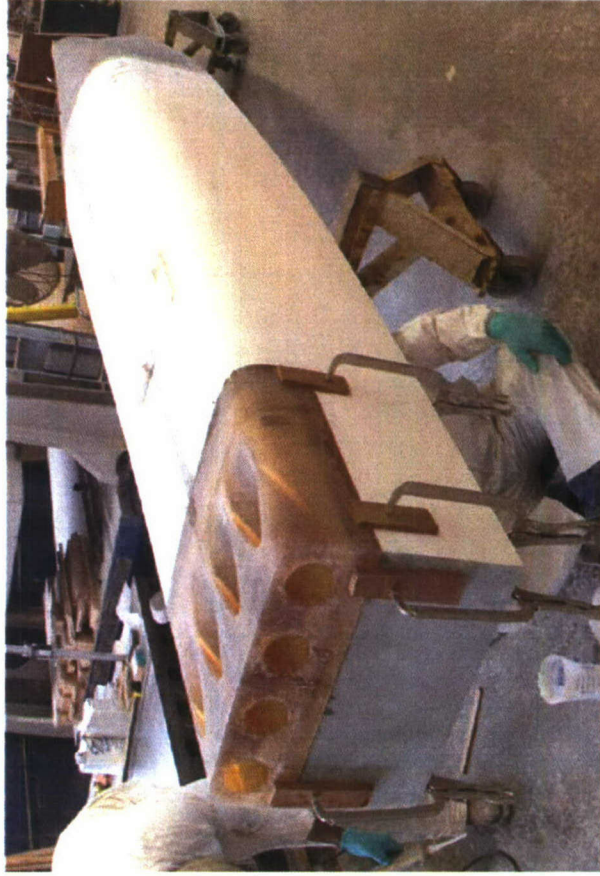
MxWJ Model 5662-1 construction and equipment installation (Feb-June 2007) - continued
